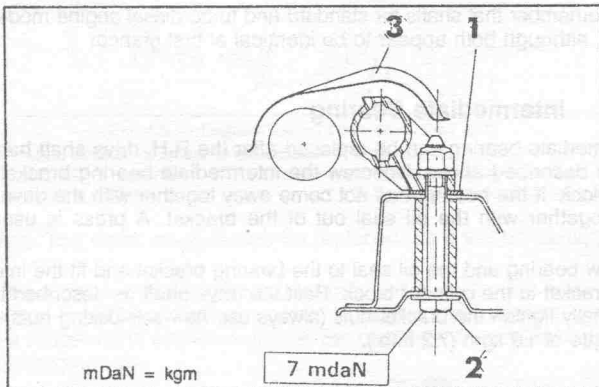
Sectional view of the steering attachment. Note the thrust washers (1) under the bolts (2). The heat shield (3) must be removed.
